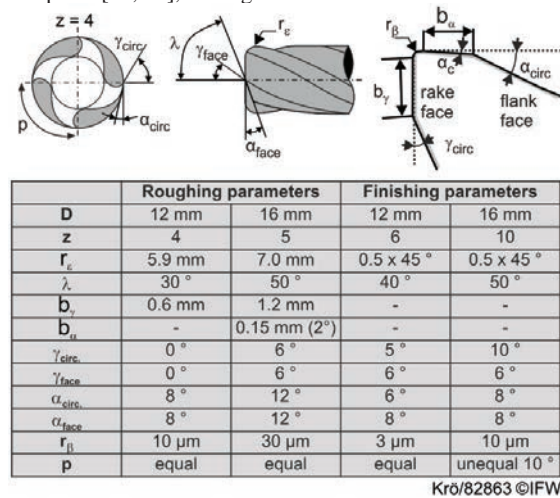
Geometrical parameters of end mills for roughing and finishing part
